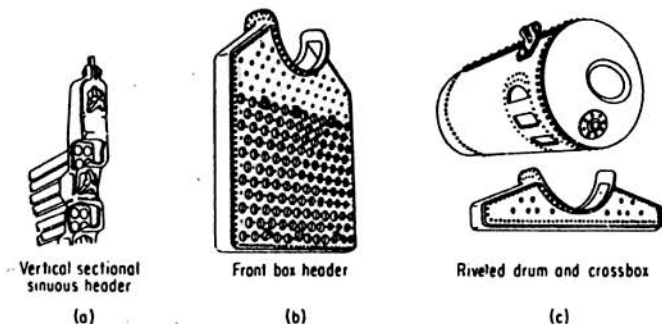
(a) Sinuous vertical sectional header with four tubes per handhole. (b) Box header for horizontal-straight-tube boiler.
